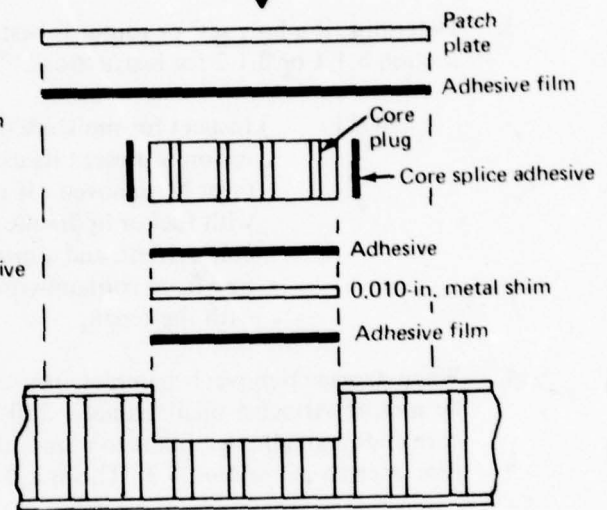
Schematic of Repair for Damage to One Sandwich Face and Core
